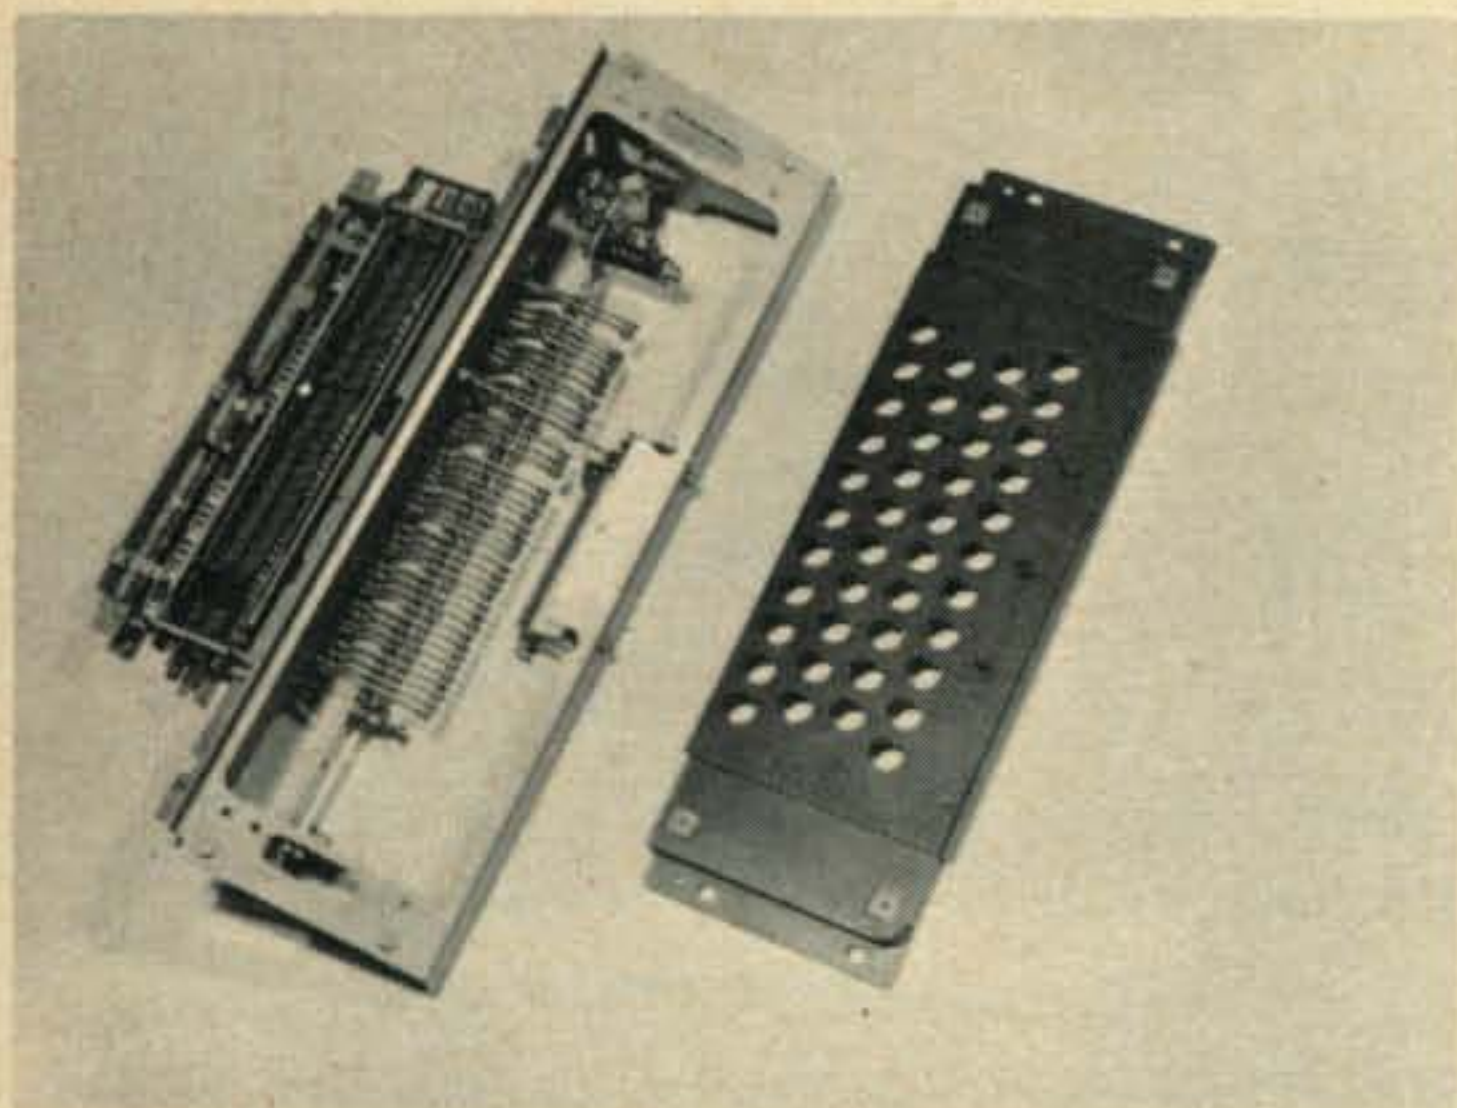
Model 28 keyboard parts which must be replaced to mount #28 units in #35 cabinets.
